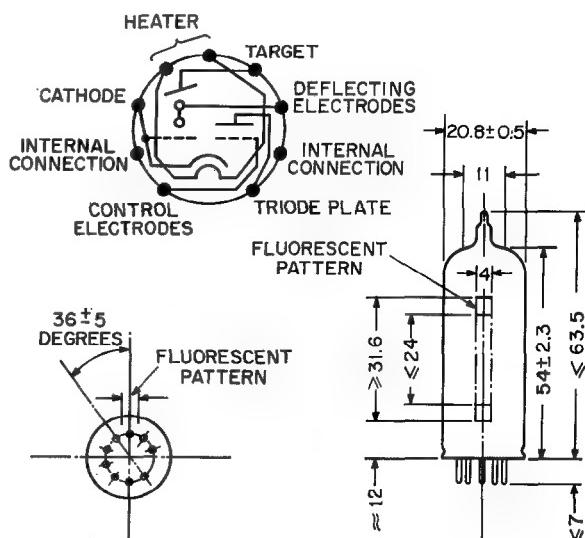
Socket connections, dimensions in millimeters, and position of fluorescent pattern on the tube.
